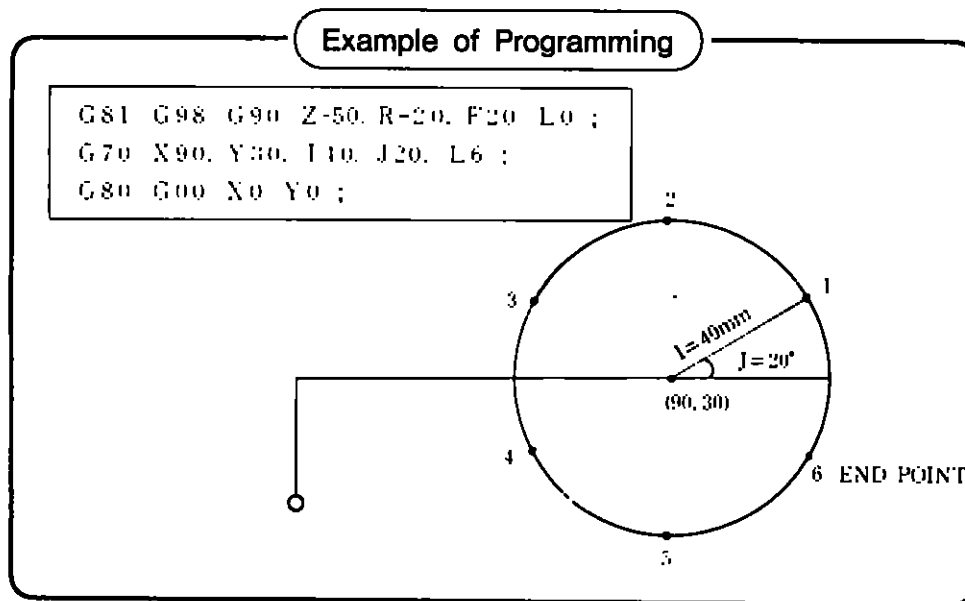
Bolt Hole Circle Command (G70)
